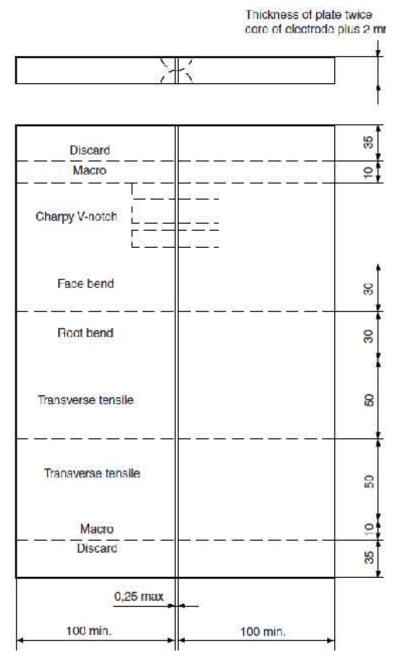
Deep penetration butt weld test assembly (All the dimensions are in mm.)
